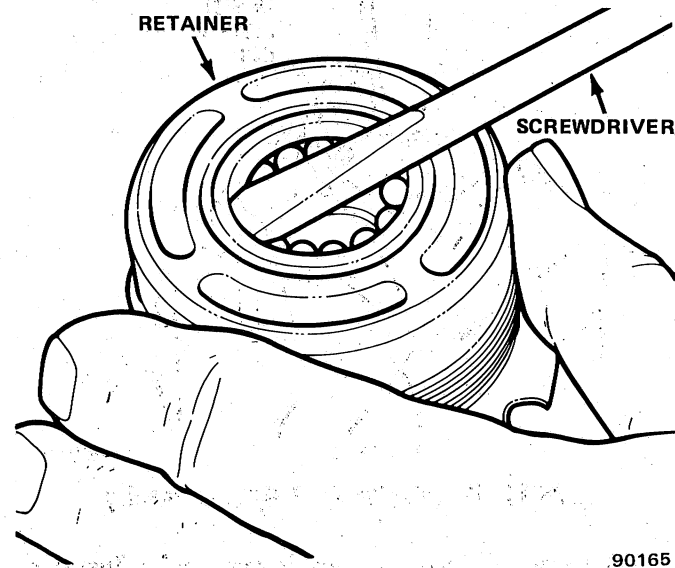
K-8 Removing Wormshaft Lower Bearing Retainer
